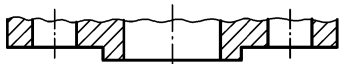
a) illustrates the arrangement but not necessarily the correct number of bolt holes. Refer to Table 3 for the actual number of bolt holes.
